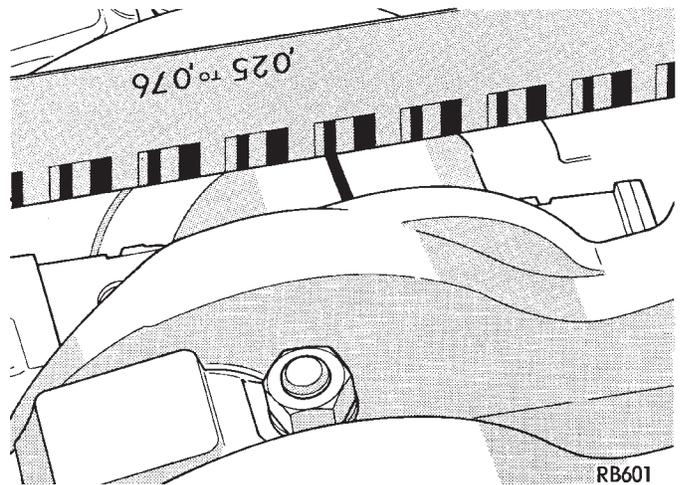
Checking Crankshaft Oil Clearance with Plastigage
